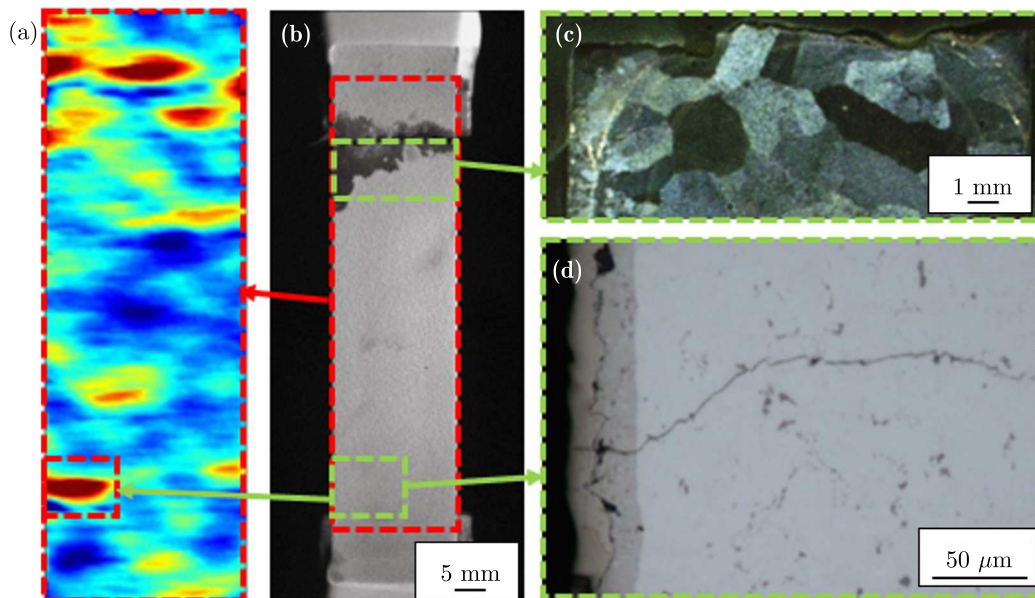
(a) Strain localisation on the specimen surface approx. 5000 cycles before failure, (b) fractured specimen in testing machine grips, (c) enlarged fractured area revealing the transgranular fracture mode, (d) cross-sectional view of the area with localized stress concentration characterized by the visible crack initiated from the coating
